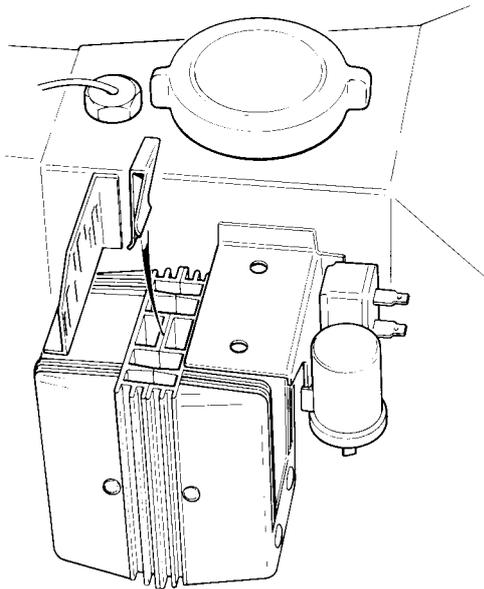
Location of Direction Indicator Flasher Unit and horn relay to the rear of the Electronic Ignition units
